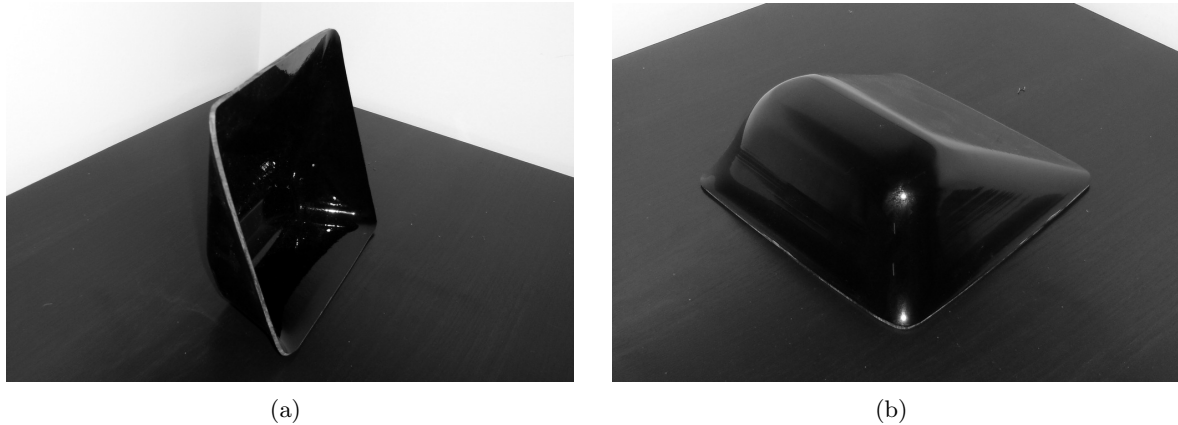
Thermoforming parts formed with SPIF sheet metal moulds: (a) formed with the positive mould; (b) formed with the negative mould
